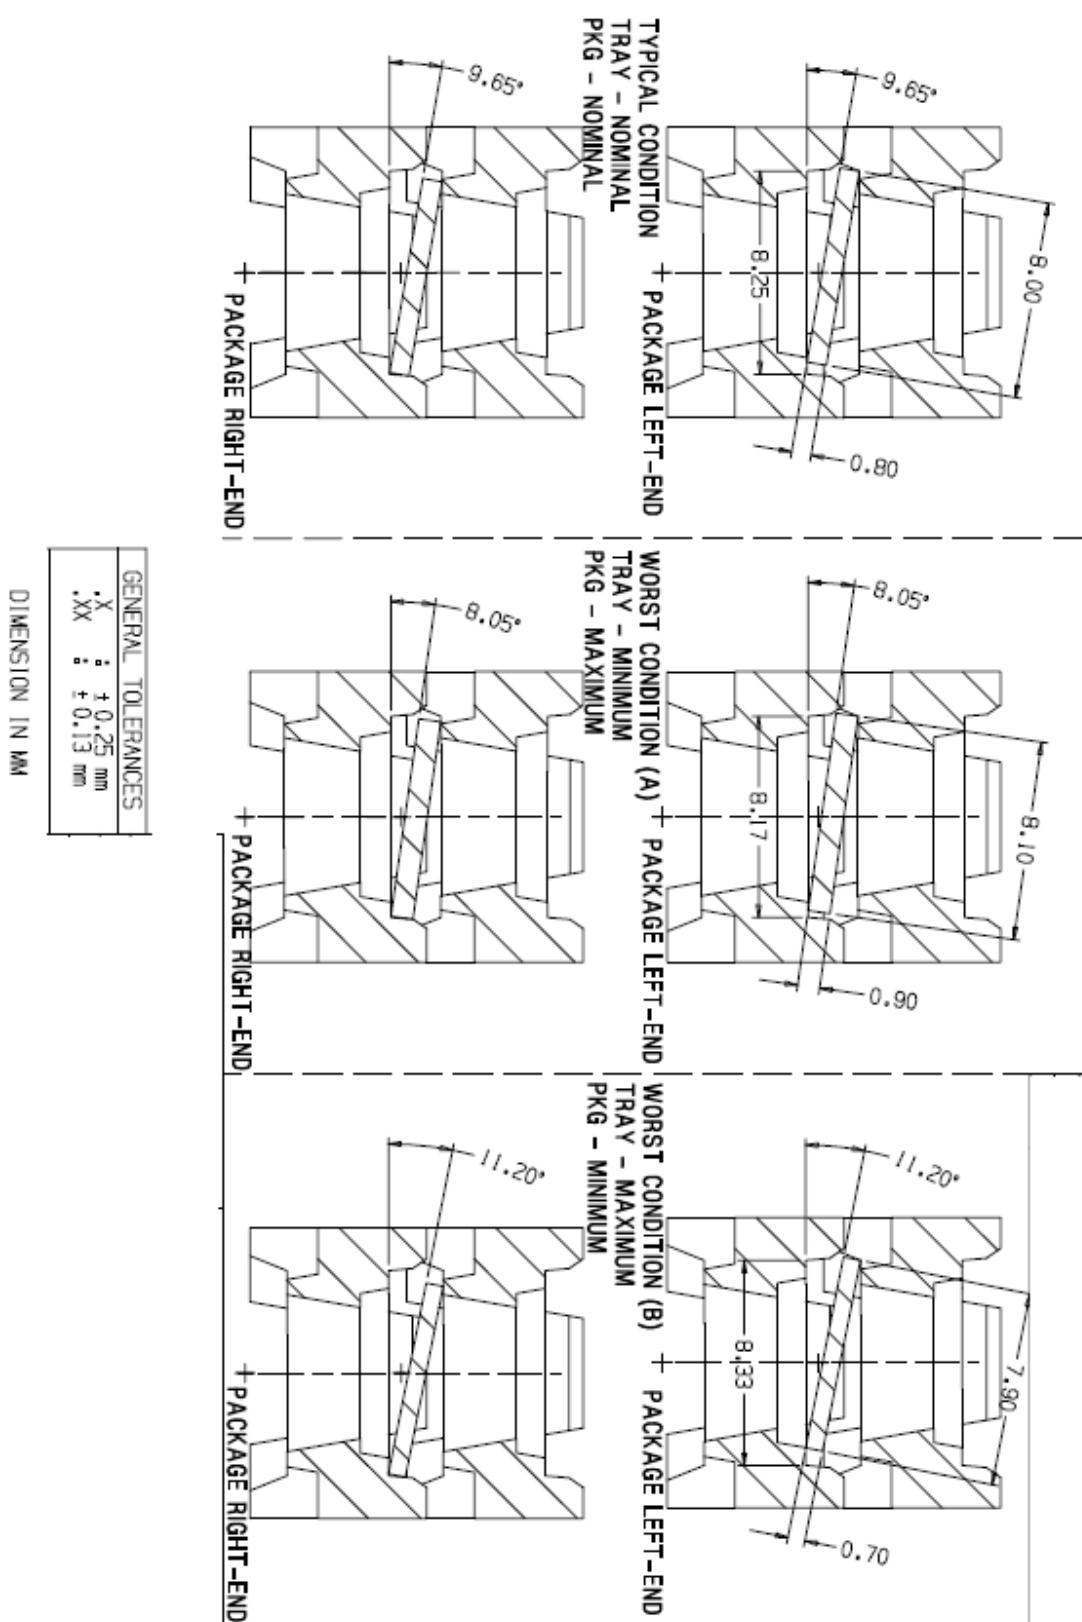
VNC2 – QFN-48 and QFN-64 Tray Dimensions – Side View
